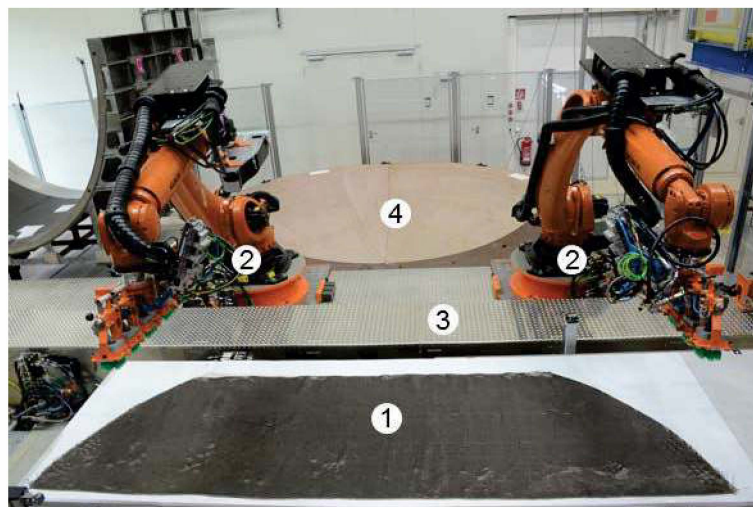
Test setup with pick-up table (1), robots and end-effectors (2), linear-axis (3) and mold (4)
